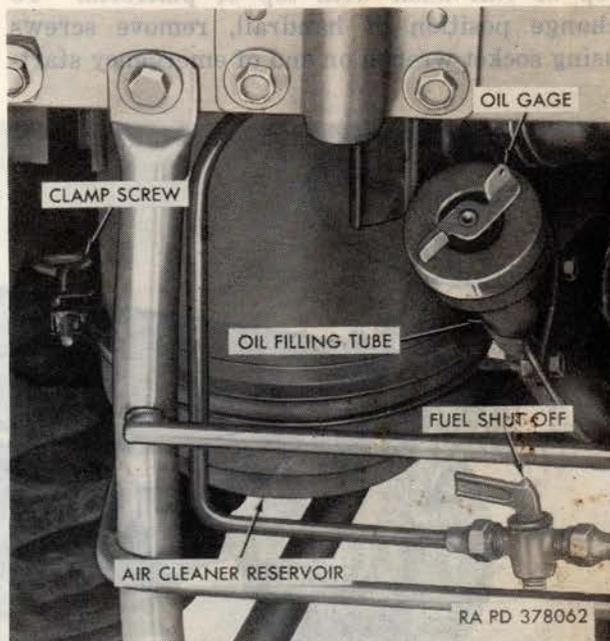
Fuel shutoff, oil gage, and air cleaner.
